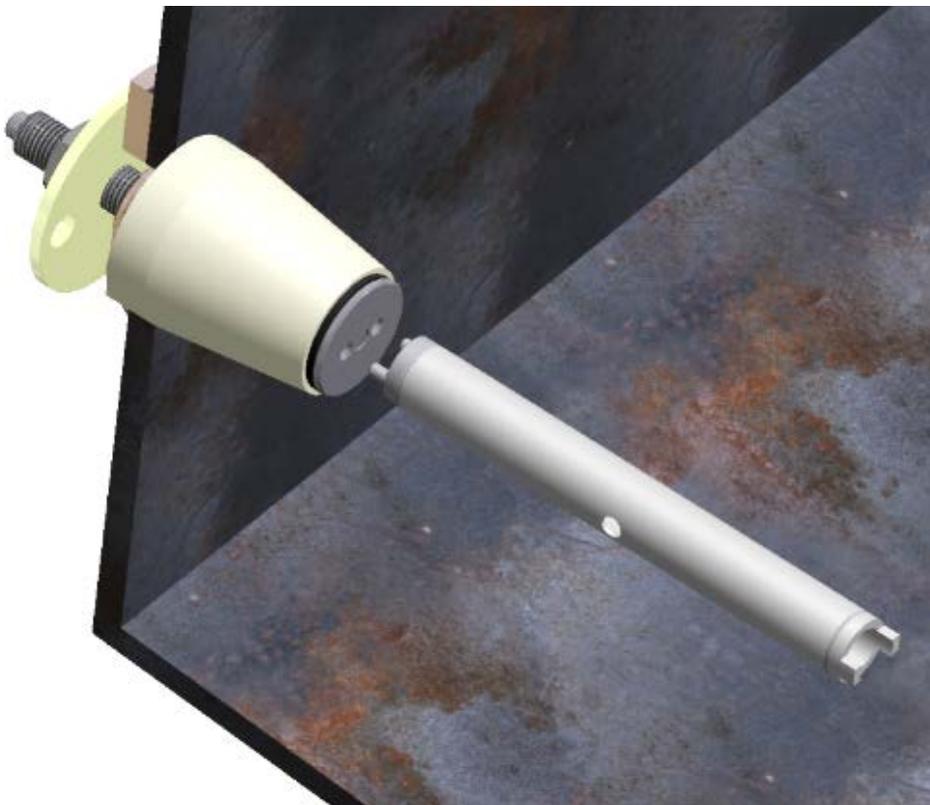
Or you can use the adjustment tool to open and close the [embedding tool](#) from the inside of the tundish.
